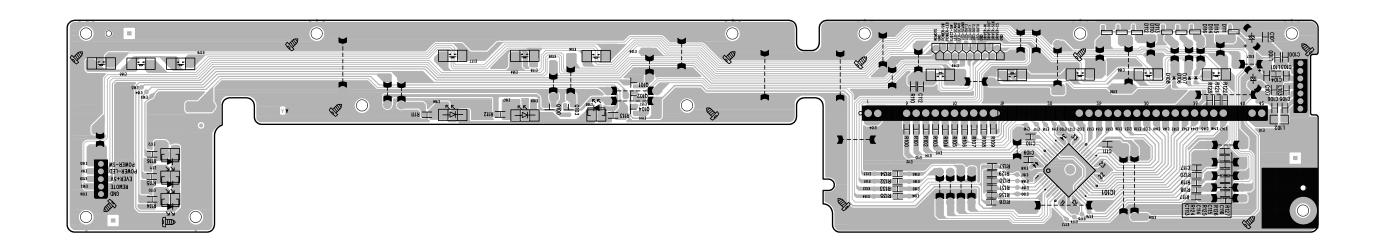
EU03A Front (R) PC Broad (Bottom side)
